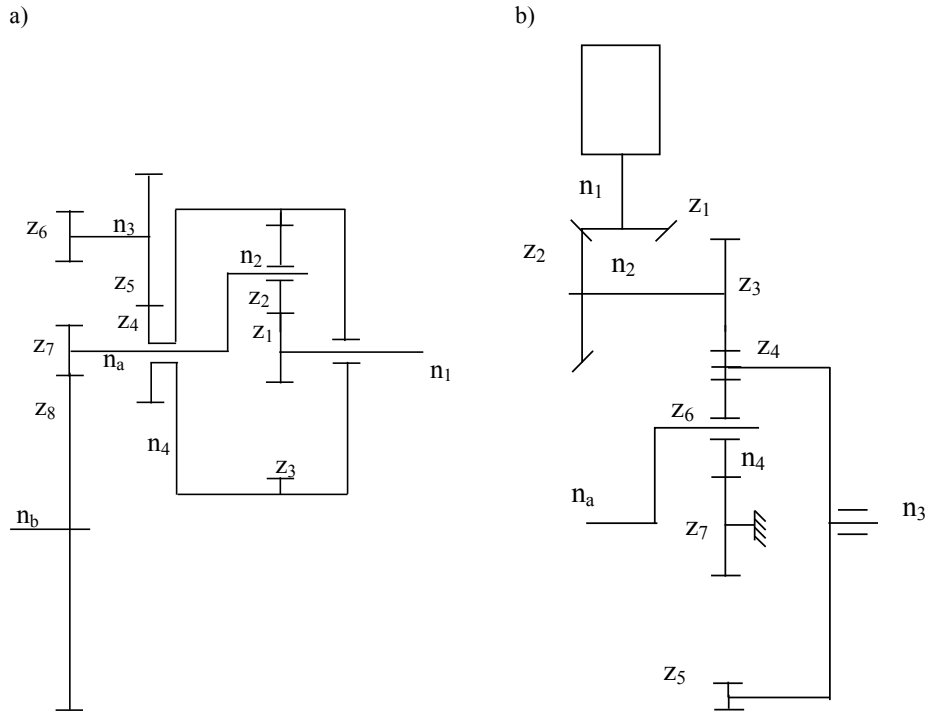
Gearbox Driving system for bucket wheel with two subsystems,
